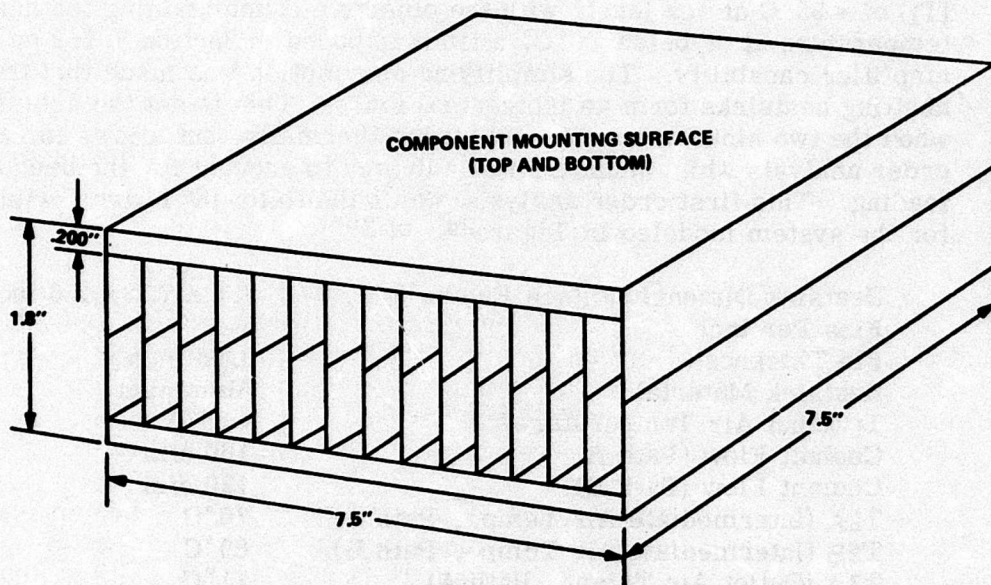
COLD PLATE HEAT SINK DESIGN
